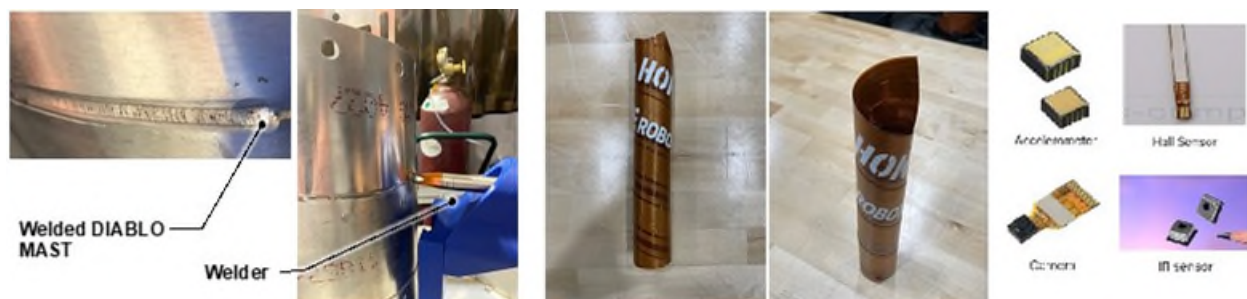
Weld DIABLO and flexDIABLO early concept development prototypes
